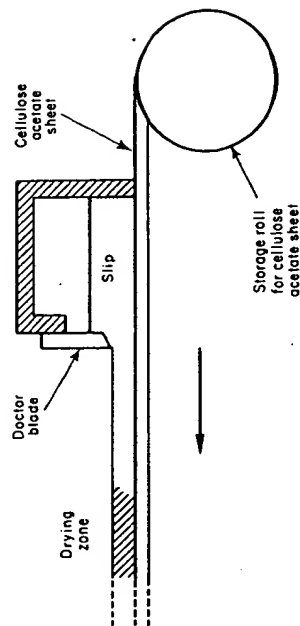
Schematic diagram of the doctor-blade casting machine.
